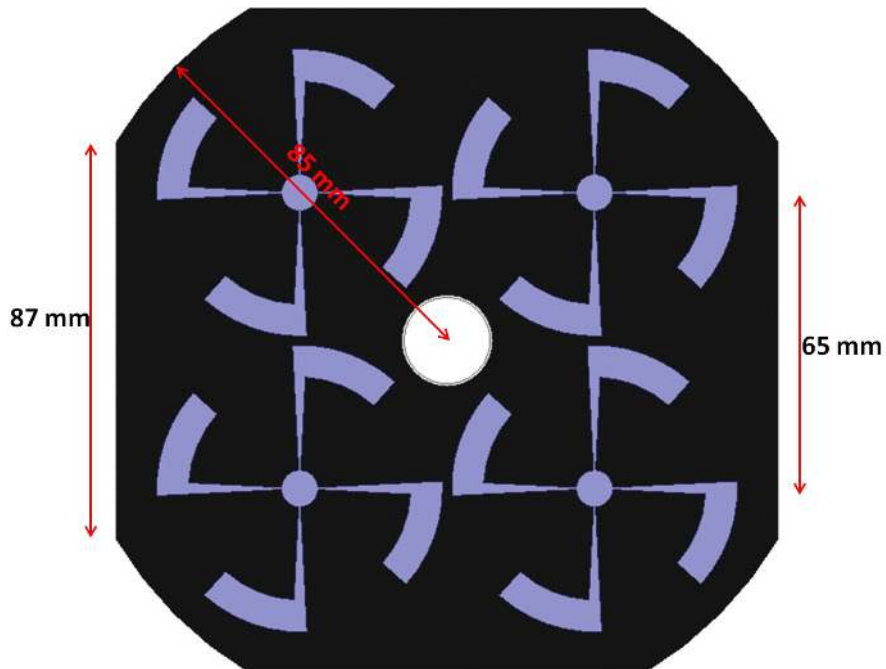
View 3 of the HPol Array. Dimensions of the middle plane.
